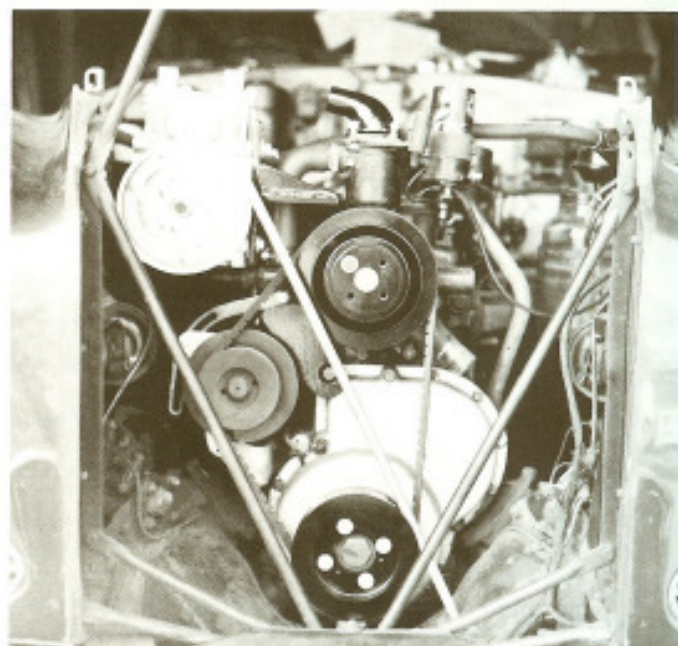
FIGURE II SCHEME FOR FITTING COMPRESSOR DRIVE PULLEY TO EXISTING S1 CRANKSHAFT PULLEY
